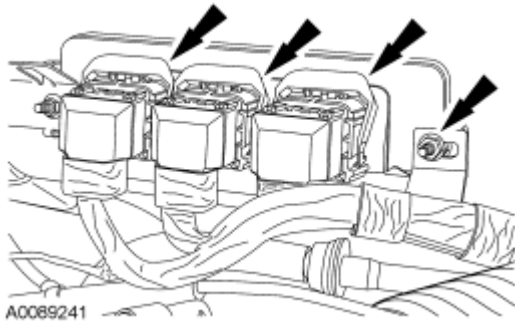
Locating Powertrain Control Module (PCM) Electrical Connectors
